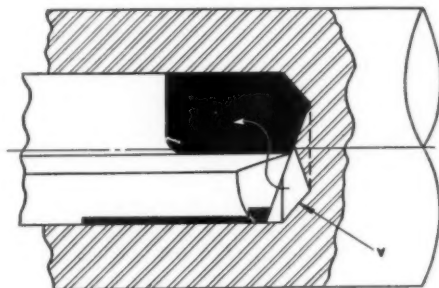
When the all-depth drill approaches a diameter of 2 1/2 inches, it is necessary to break the broad chip which comes from both the 20° and the 42° cutting angles. Steps ground in the cutting edges will do this effectively.
